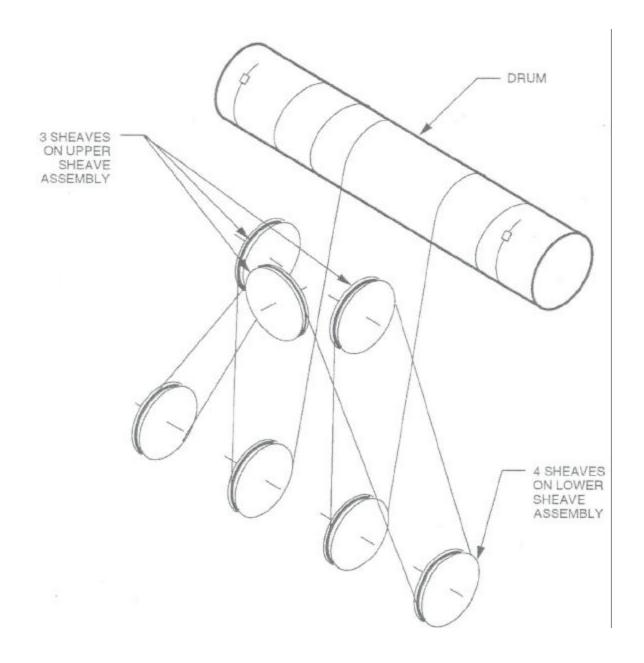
30-Ton Bridge Cranes, Rope Reeving Assembly
